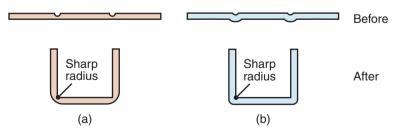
Application of (a) scoring or (b) embossing to obtain a sharp inner radius in bending. Unless properly designed, these features can lead to fracture. *Source:* Courtesy of Society of Manufacturing Engineers.
